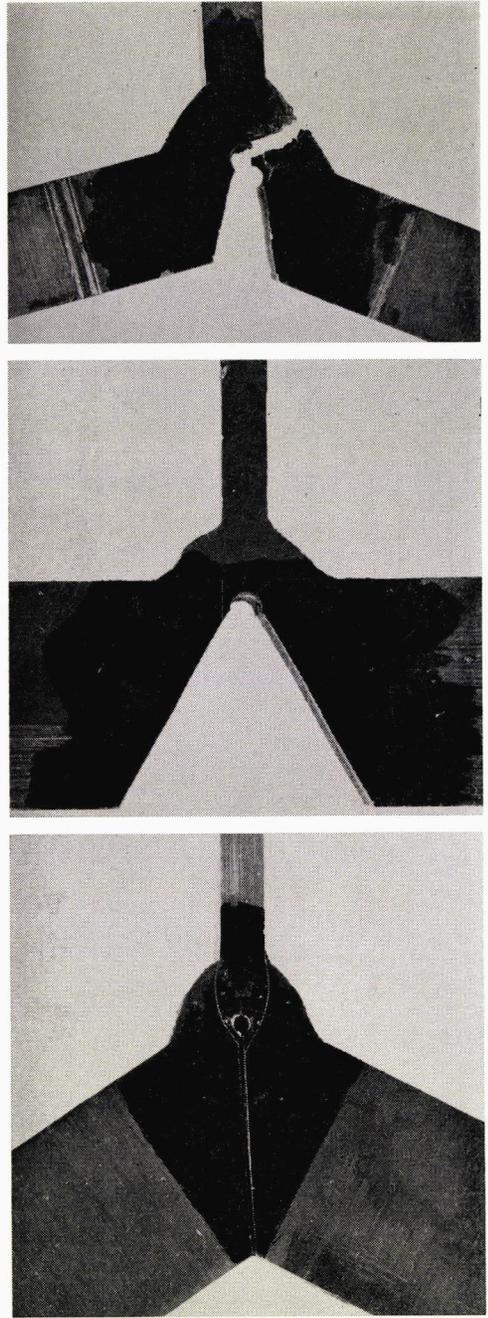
Post-test appearance of (top) specimen with 1 1/8-in. flange and failure of soft weld metal of RB 87 hardness due to segregation and porosity; (center) specimen (before satisfactory test) with 1 3/8-in. flange and weld metal of RB 87 hardness; (bottom) specimen with 2 1/2-in. flange and weld metal of RB 90 hardness exhibiting no failure.
